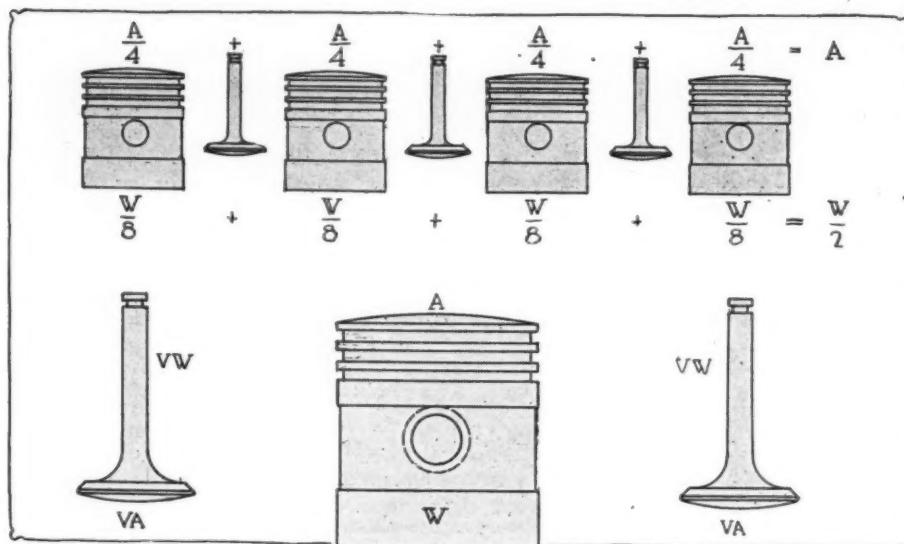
Illustrating Newcombe's law. Above—Four pistons each half the size of the large piston shown below or 3 inches in diameter. This shows how by decreasing size an equal piston area is obtained while the reciprocating weight is thereby cut exactly in half. Below 3 inches mechanical difficulties limit carrying the law to the extreme
